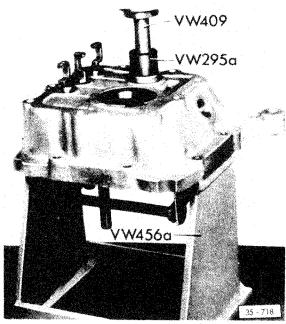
Pinion needle bearing in gear carrier housing, installing
